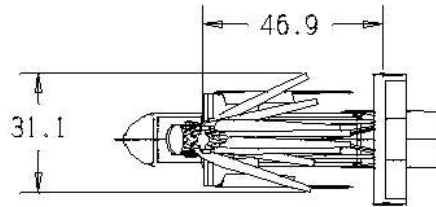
Dimensioned engineering drawing of MTR-JHL in stowed configuration.
